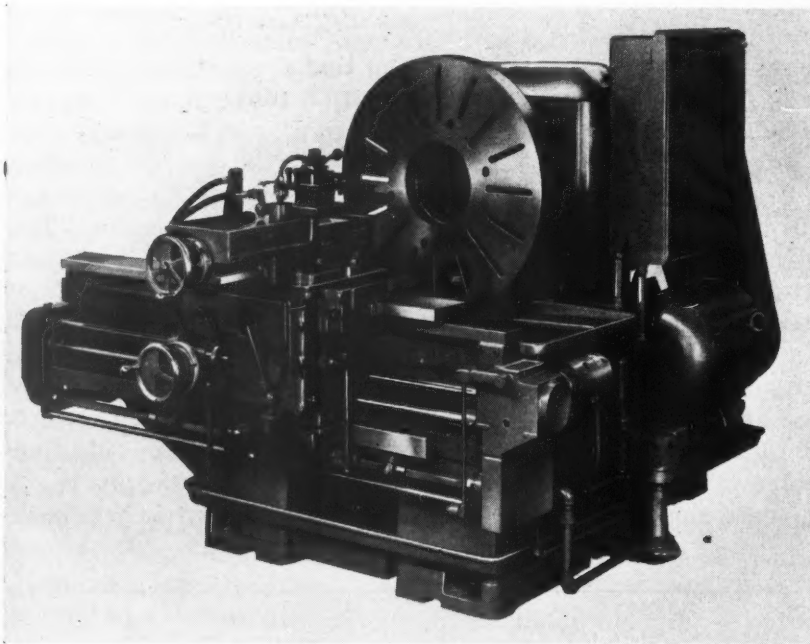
(Above) Lodge & Shipley right-angle chucking lathe designed for machining jet-engine parts
